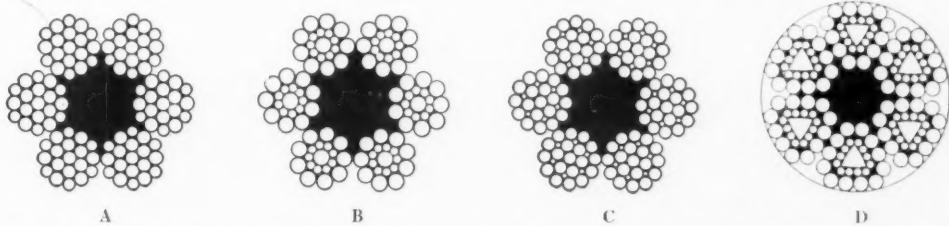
Courtesy of Hazard Wire Rope Co., and The American Cable Co., Inc.—Showing at (A) the Warrington type construction; (B) The relative location of the strands in Seal construction, and at (C) the filler wire or modified Seal type of rope construction. (D)—Courtesy of A. Leschen & Sons Rope Co. The Flattened Strand type of construction for wire rope, which provides for a larger and flatter bearing area between the strands.
